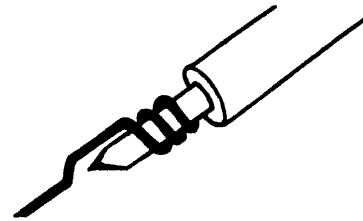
Extending the tip of a soldering iron using bare copper wire
